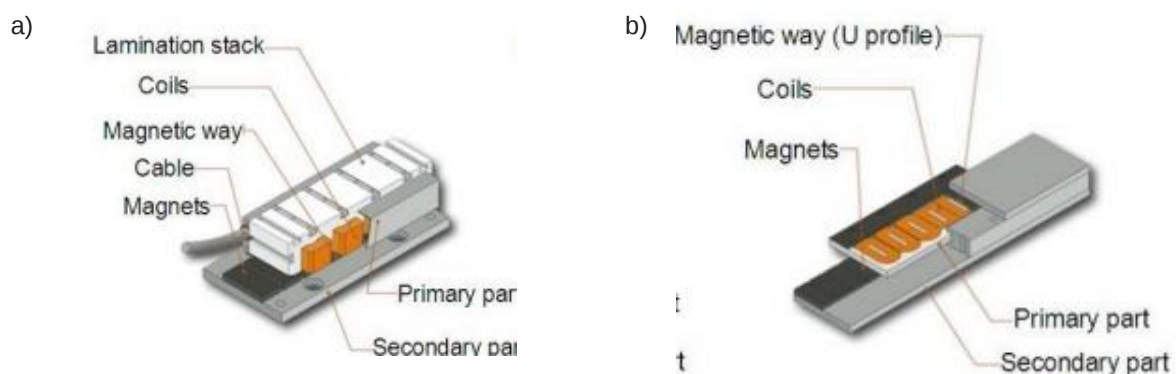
Ironcore and Ironless Linear Motor, [2]
